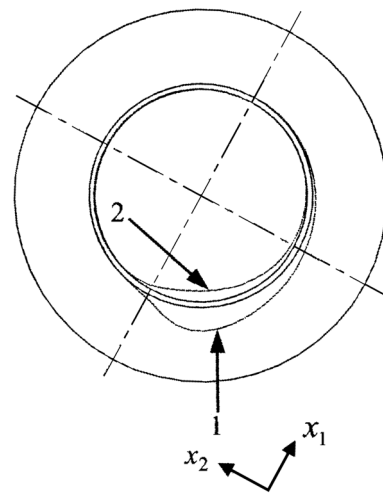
Fluid film bearing with deformed surfaces (1—bearing surface; 2—shaft journal surface). (Temis and Temis, 2003.) Courtesy ISCORMA-2.
